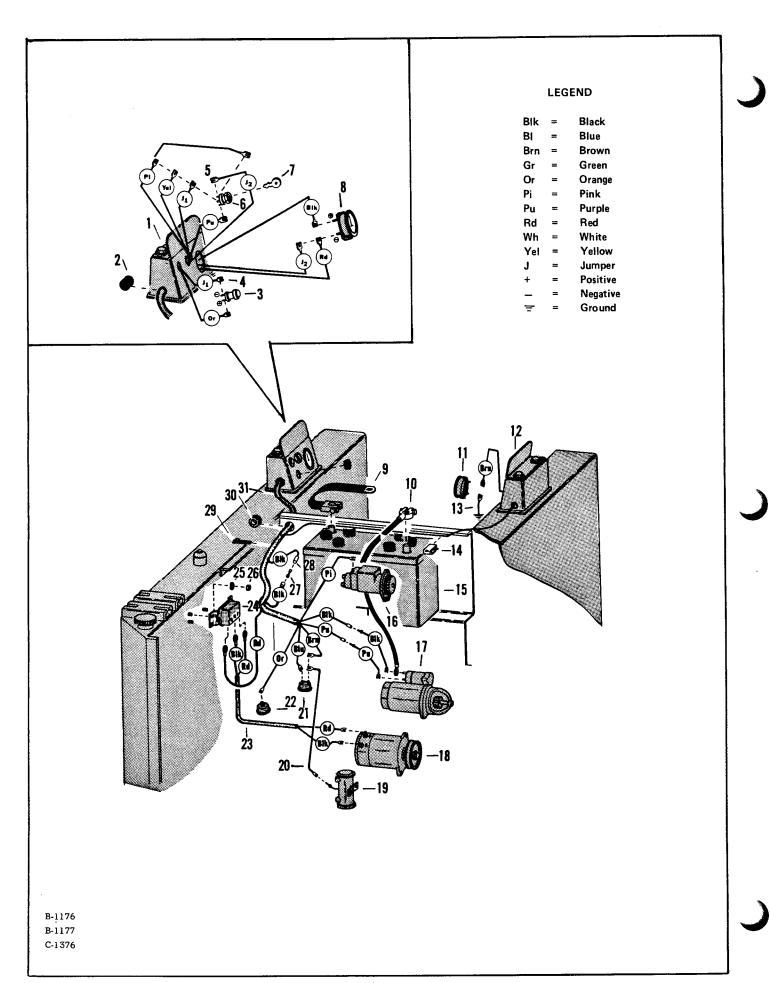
Main Frame Electrical Circuit (500 Gasoline S/N 42806 & Below)
